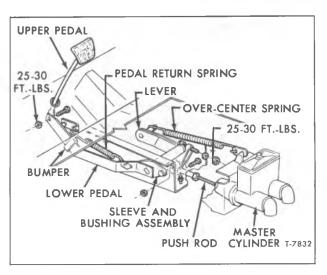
Clutch Pedal and Linkage ("TE" and "TS" Models)
